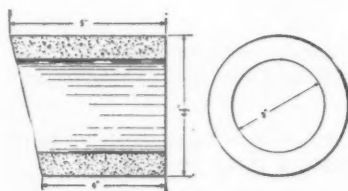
SECTION OF CLAY PROTECTING TIP.
